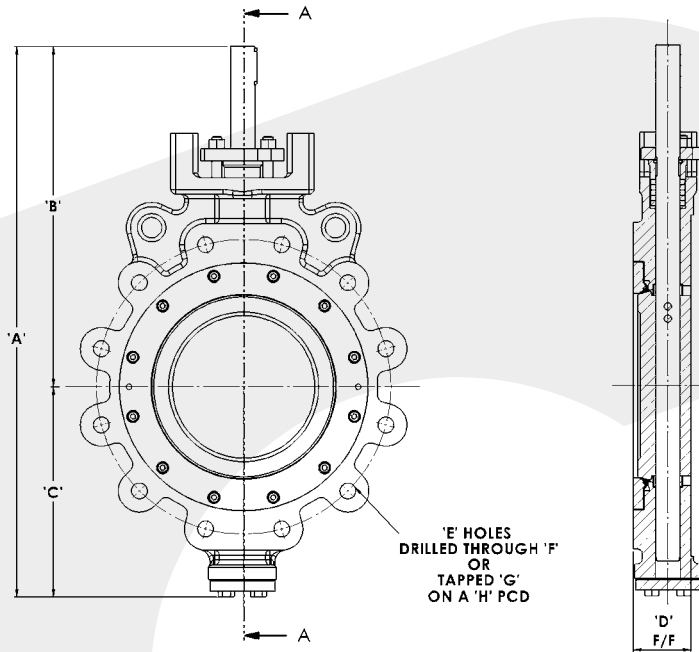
Bare stemmed GA drawing, double-offset lug-type flat face (BU02)
